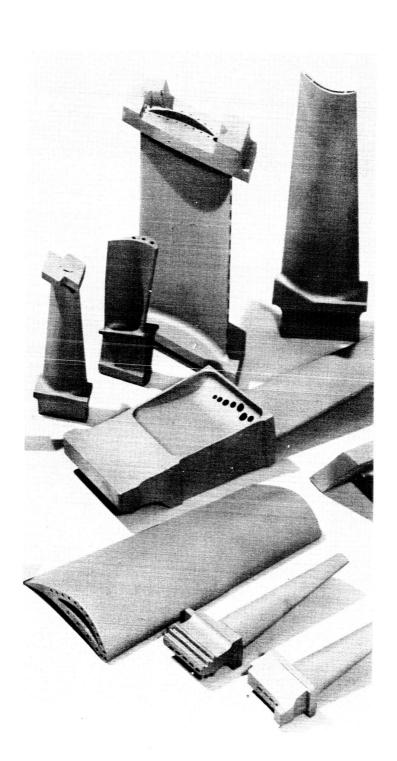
EXAMPLES OF AIR-COOLED TURBINE BLADES (Courtesy Austenal Microcast Division, Howmet Corporation)
